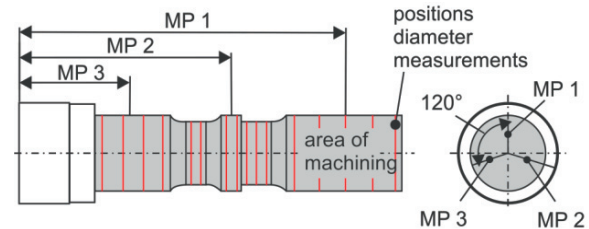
Measurement positions (MP) of the thermocouples respectively the workpiece diameter
